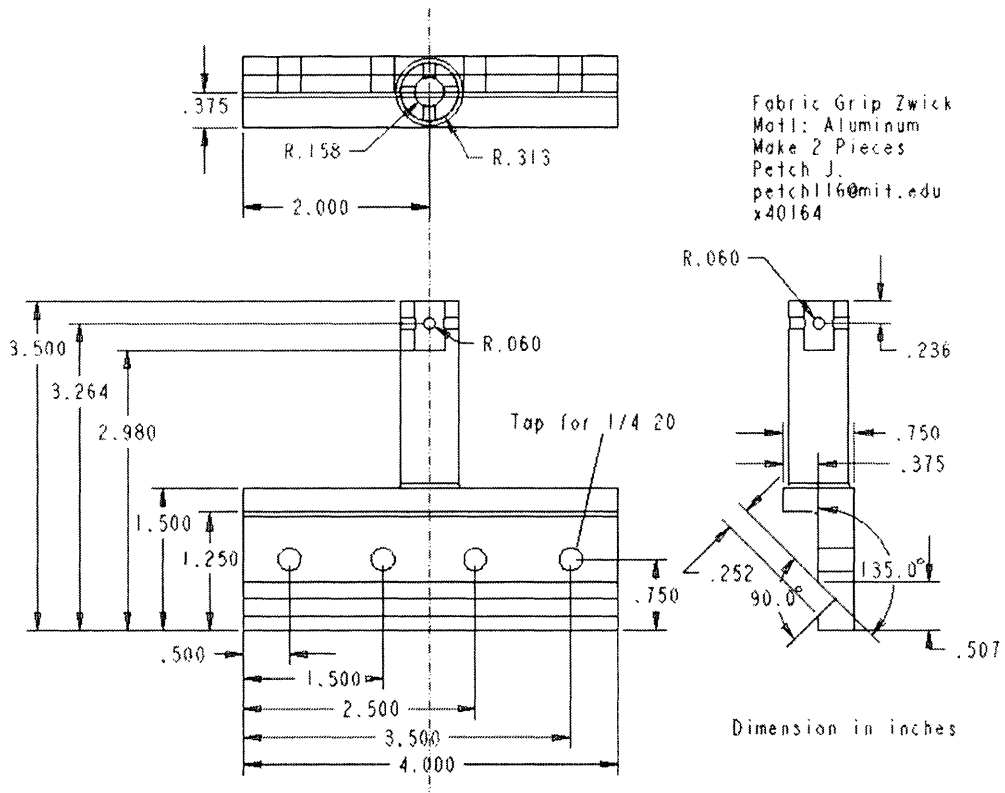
Drawings of fabric uniaxial tensile grip (A)
